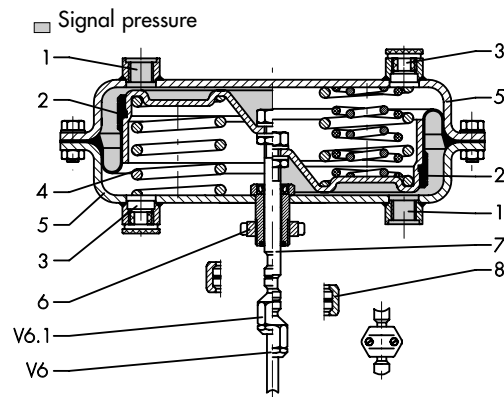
· Sectional drawing of the Type 3271 Pneumatic Actuator (right half of diaphragm with additional springs)
